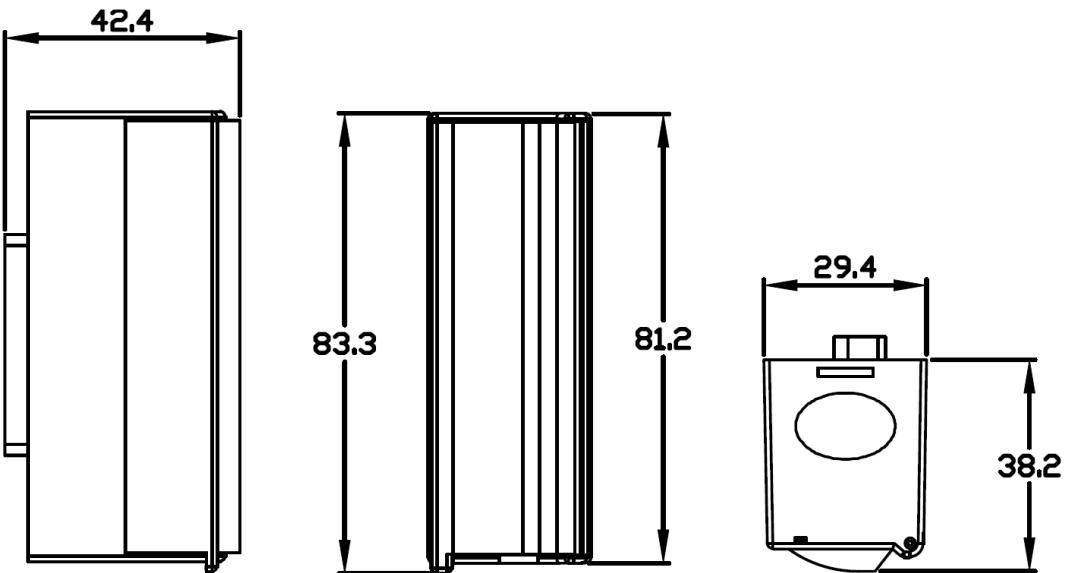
, Figure 2-7, Figure 2-8 The CN-1824 left side, front and top view
